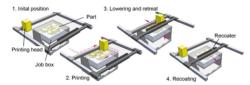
3D printing mold process for sand casting (Li, 2021)
